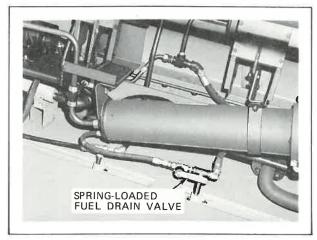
TYPICAL FUEL DRAIN VALVE ARRANGEMENT.
